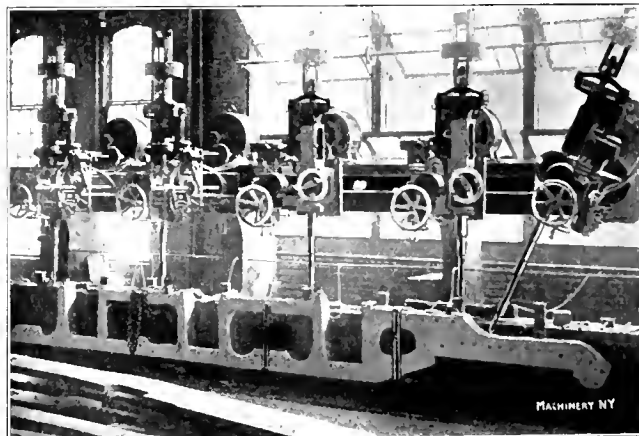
Five-spindle Drill at work on a Locomotive Frame
